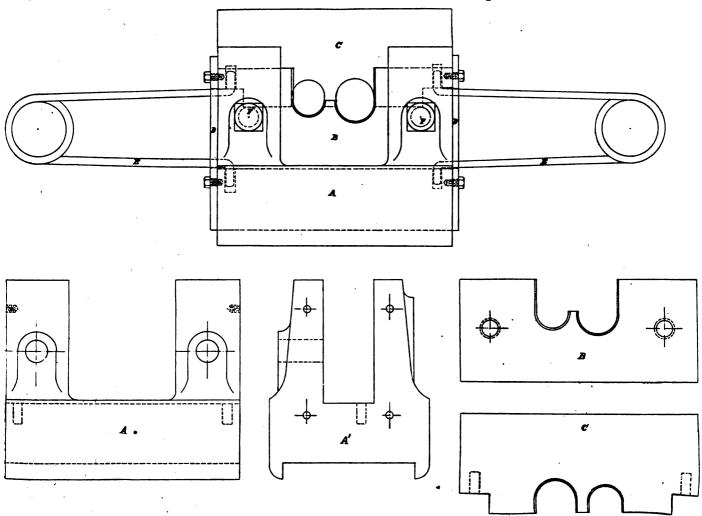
UPPER VIEW IS A SIDE ELEVATION OF COMPLETE SHEAR. LOWER VIEWS ARE DETAILS OF PARTS.
